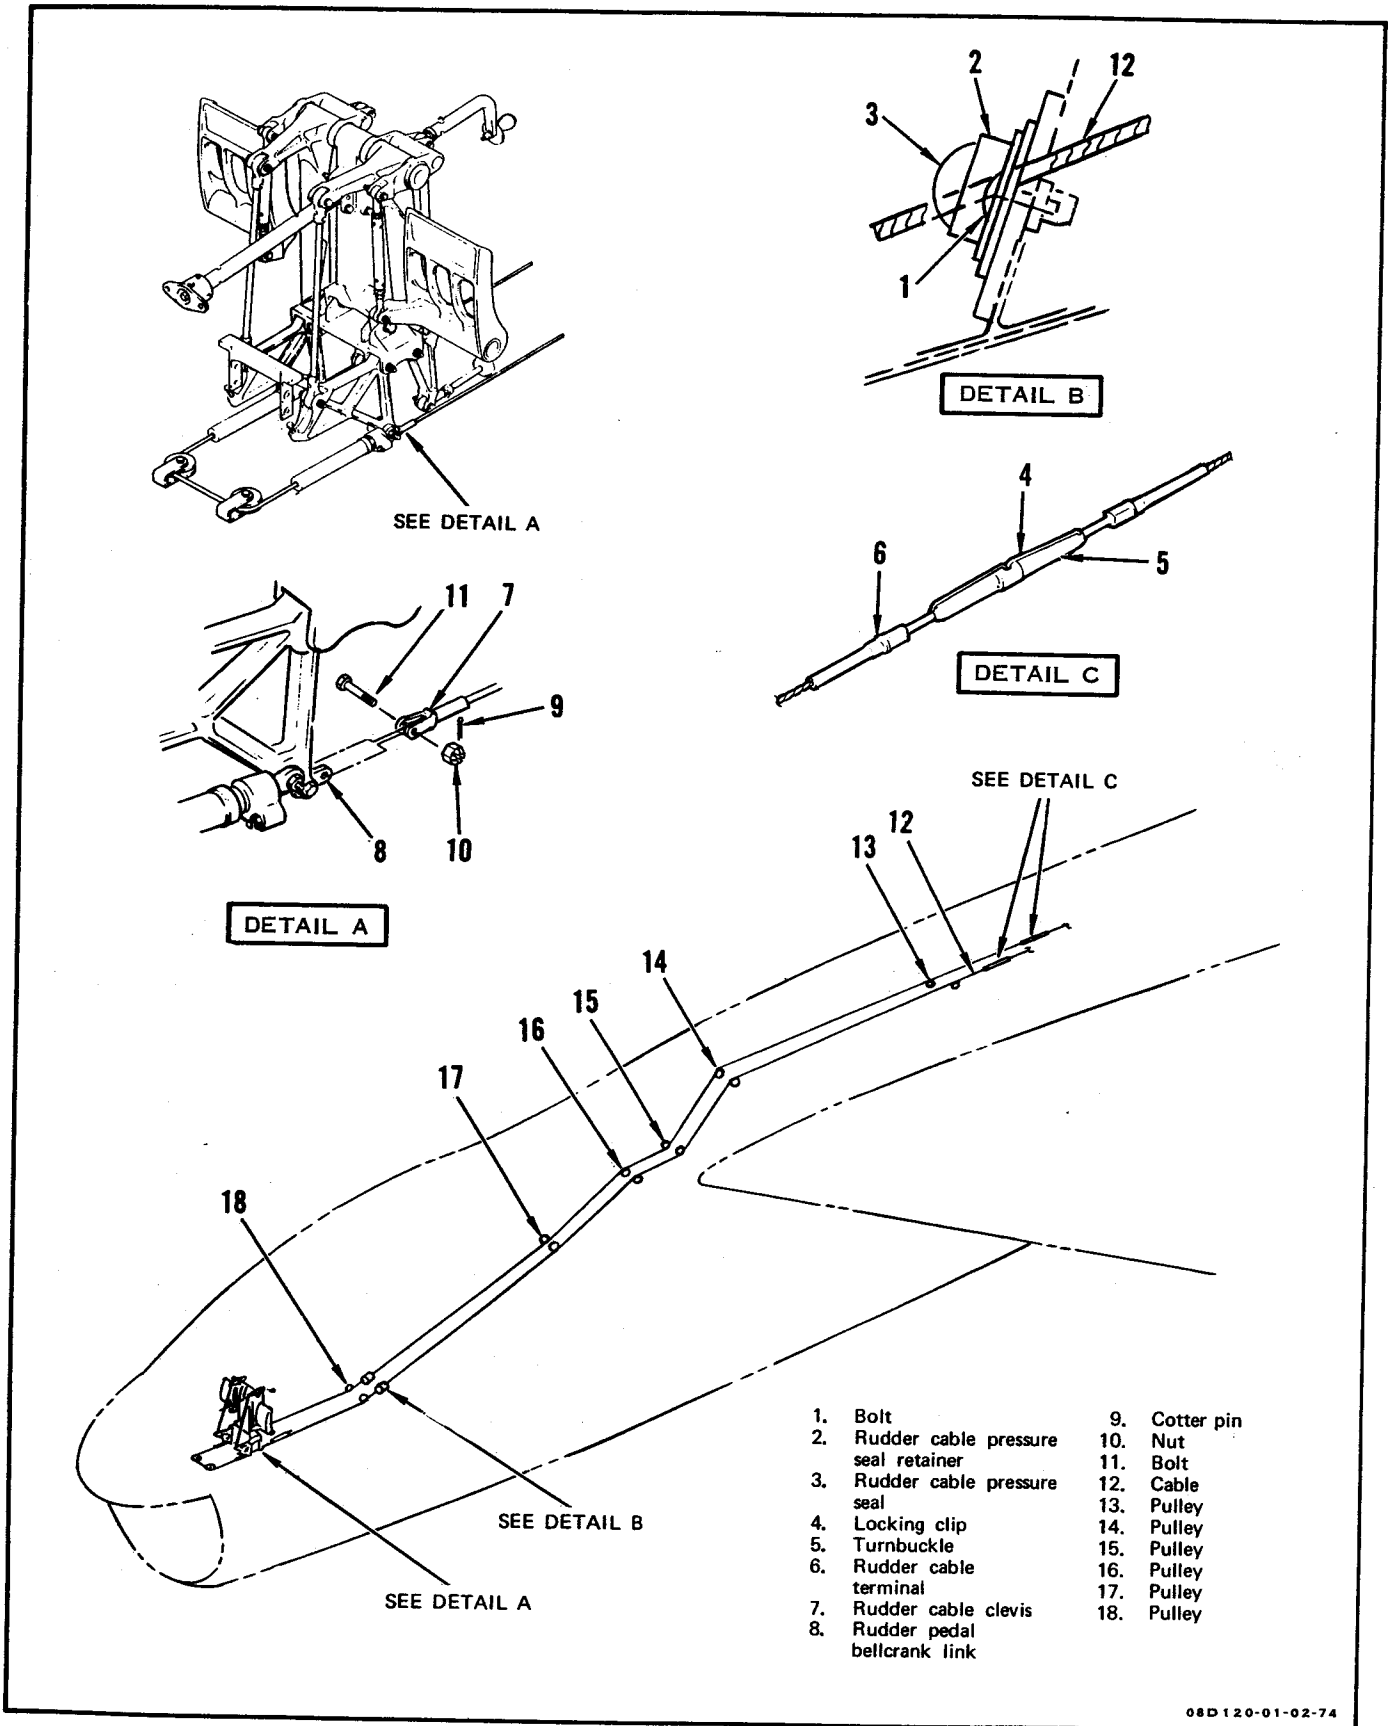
Rudder Pedal Jumper Cable Assembly Removal and Installation
